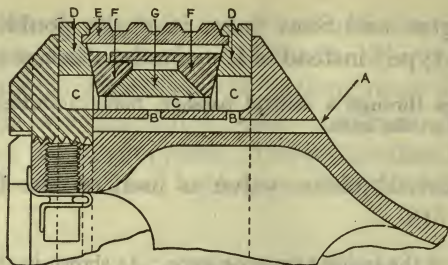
Detail of Chandler and Taylor balanced piston valve; A, BB, steam inlet ports to rings; CCC, steam space; DD, snap rings; E, connecting ring; F, F, wall rings; G, wedge ring.
